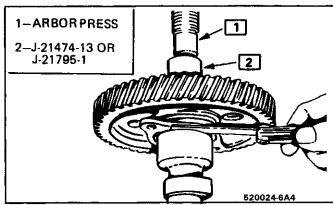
Camshaft Timing Gear/Thrust Plate End Clearance
